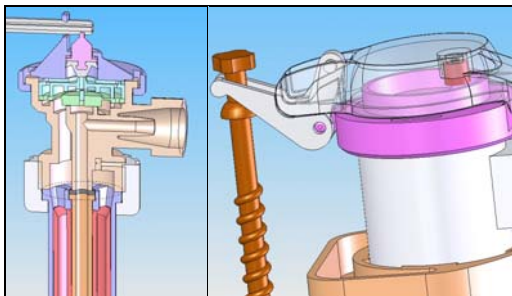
Rocker arm design studies, at right two pieces rocker arm+ cam in valve cap.
